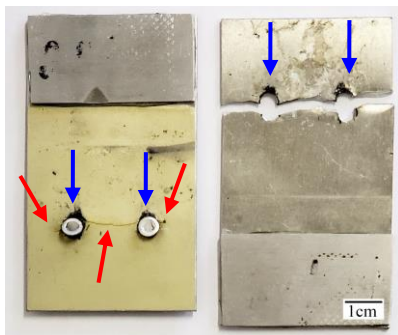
2.24 specimen. Cracks pointed by green arrows and fretting by red ones.
